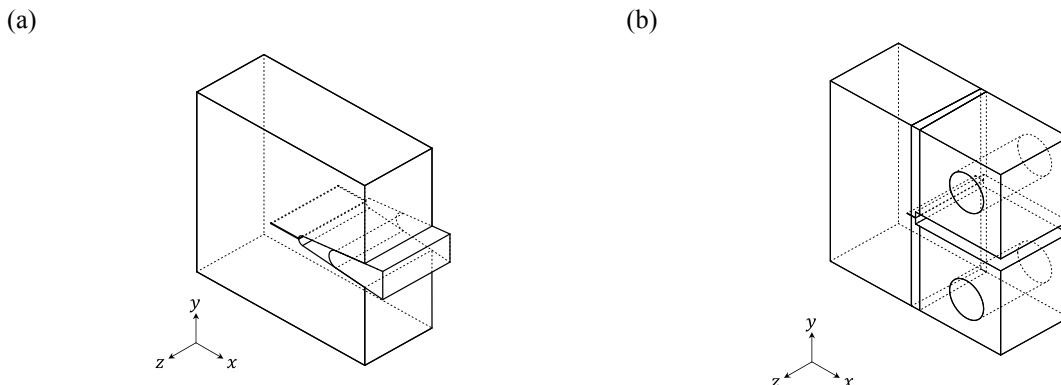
(a) Wedge-loaded C(T) specimen and (b) EB welded C(T) specimen.
